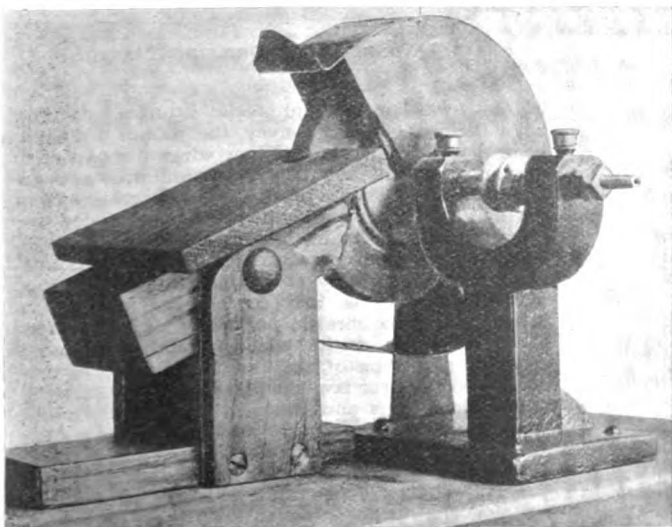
SHOWS CORUNDUM WHEEL FITTED FOR GRINDING TOOLS.
